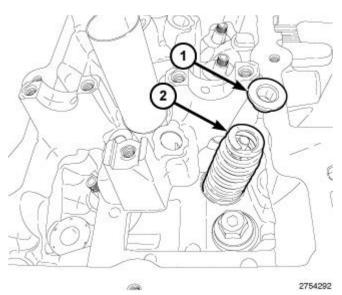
Valve Spring & Valve Spring Retainer Courtesy of CHRYSLER GROUP, LLC
